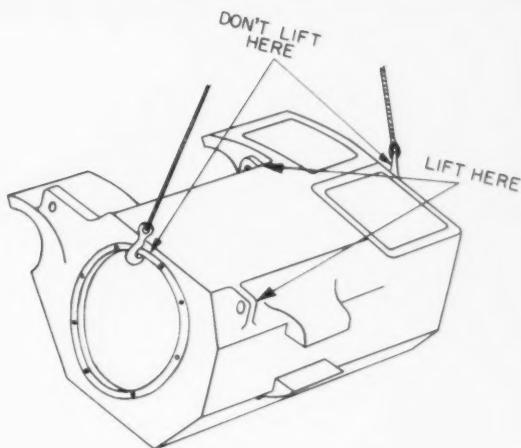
Crane hooks should be attached to lifting bails, not to accurately machined frame-head bores.
